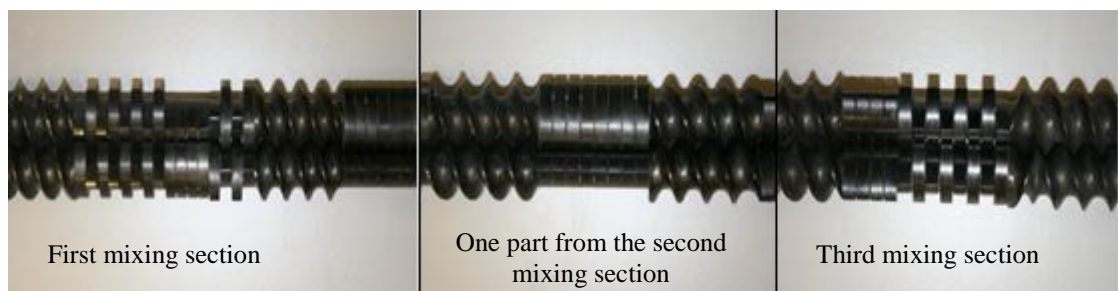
Twin screw mixing sections of Prism Eurolab 16 mm TSE
